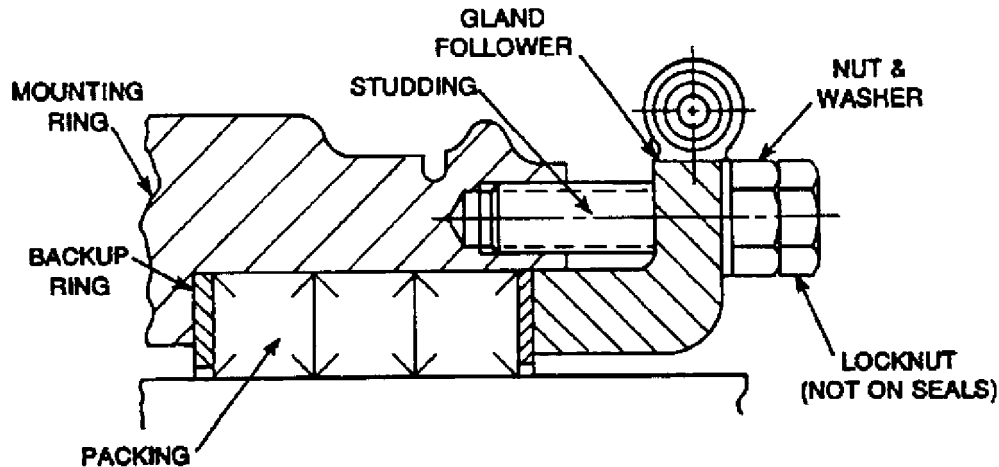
MX9 Stern Tube Seal with Packing Installed
